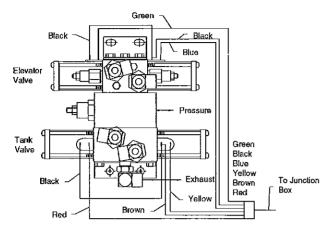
VALVE ELECTRICAL CONNECTION
